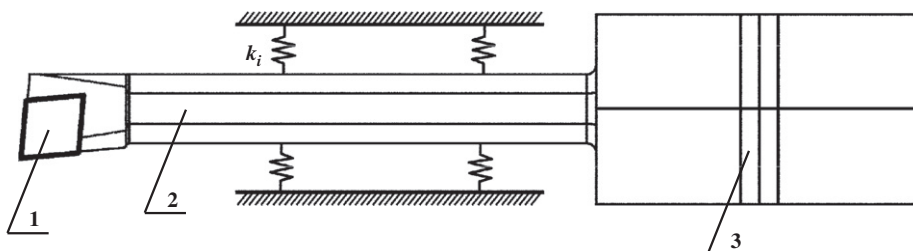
Schematic representation of computation model of vibration turning tool: tool fixing areas are connected to fixed support through springs (with stiffness k_i) located at each node of the fixing area. 1—tool insert, 2—concentrator of mechanical vibrations and 3—piezoelectric transducer.
